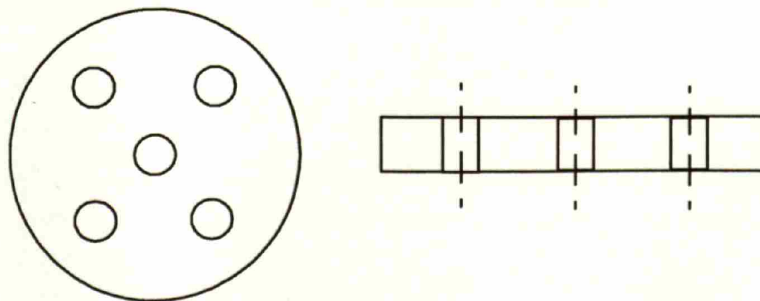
Possible die geometry and cross-section with five hole layout.
